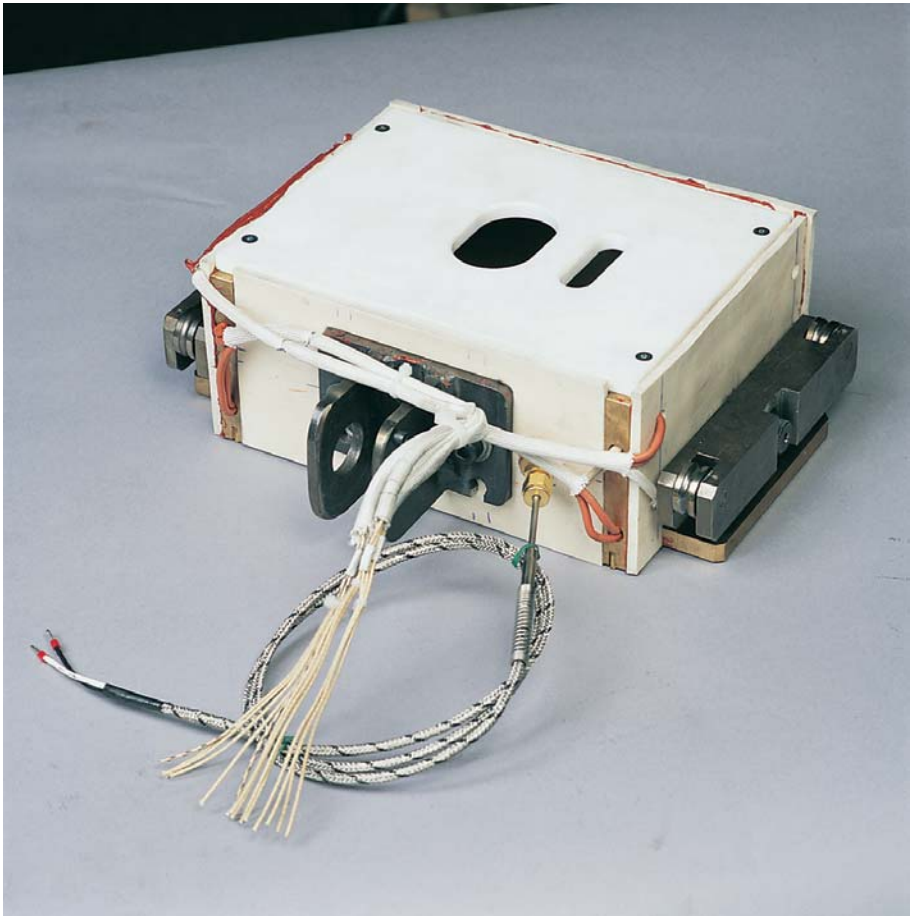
Moving filling shoe equipped with heating accessories and insulation.
